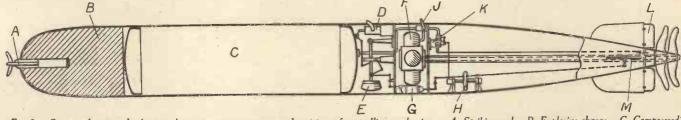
Section of a torpedo showing the various compartments and positions of controlling mechanism. A. Striking rod. B. Explosive charge. C. Compressed air chamber. D. Hydrostatic valve. E. Pendulum weight. F. Propelling engines. G. Auxiliary motor for operating horizontal rudders. H. Gyroscope-J. Trip lever of starting valve. K. Small compressed-air motor for operating vertical rudders. L. Vertical rudders. M. Horizontal rudders.
